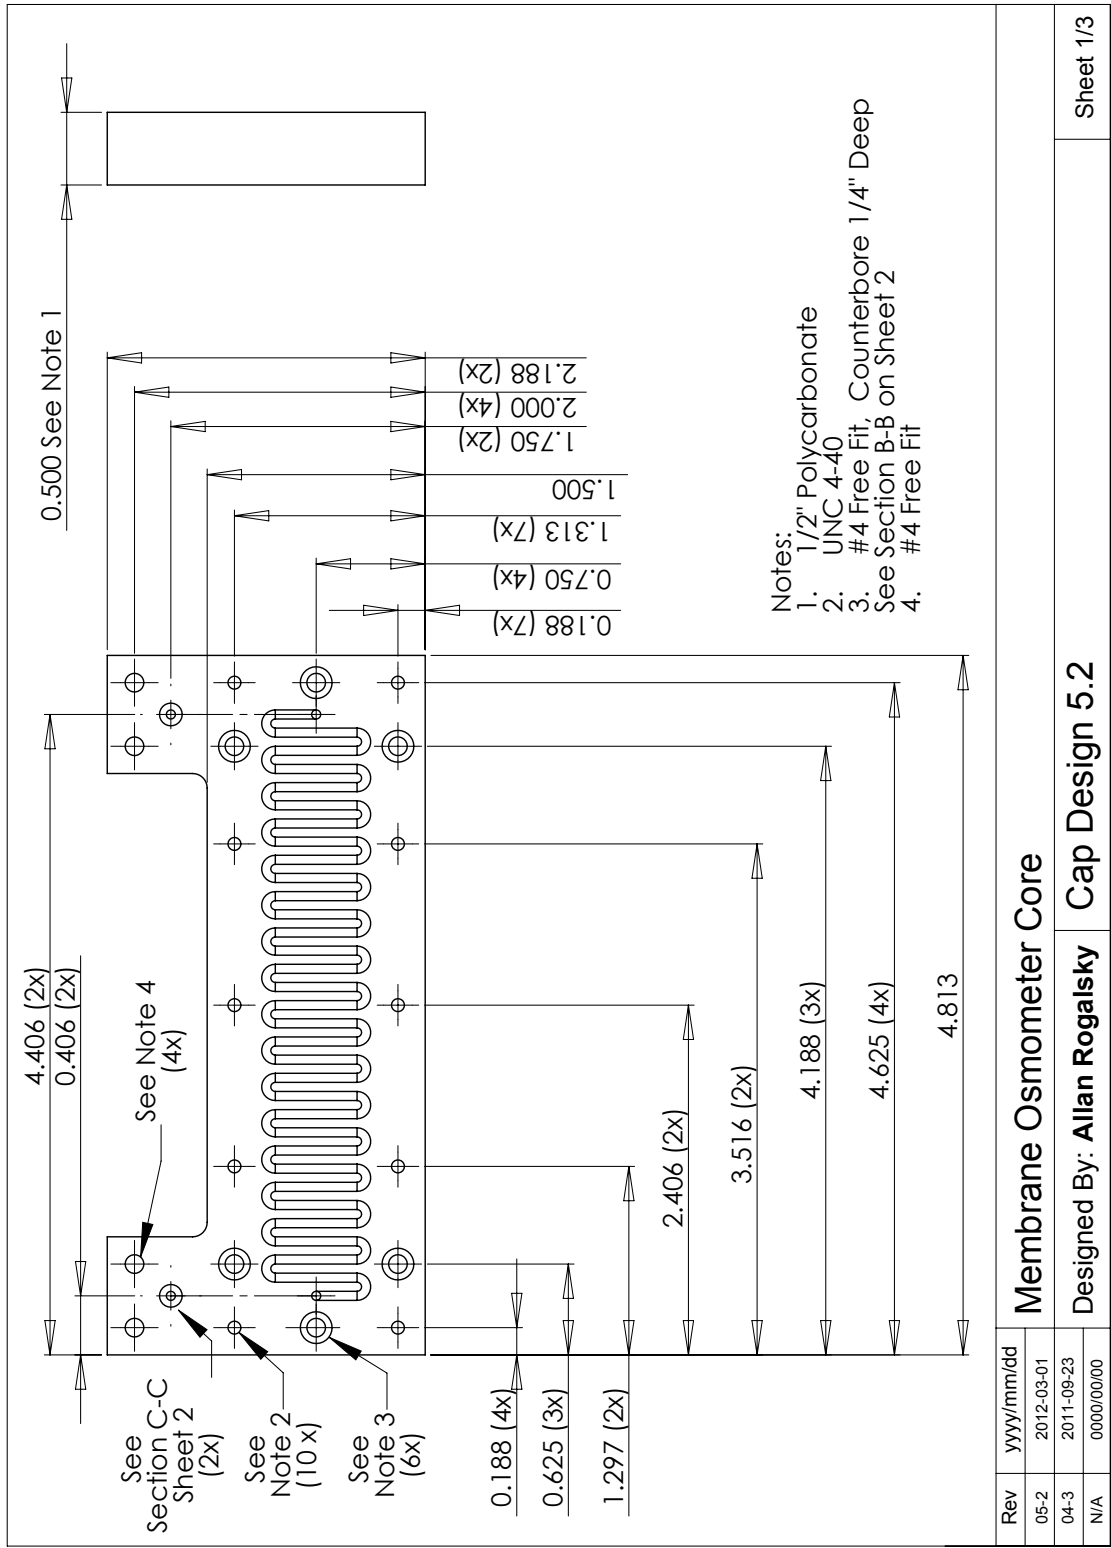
Osmometer Top Level 5.2 / Core Assembly 5.2 / Cap 5.2 / Sheet 1
